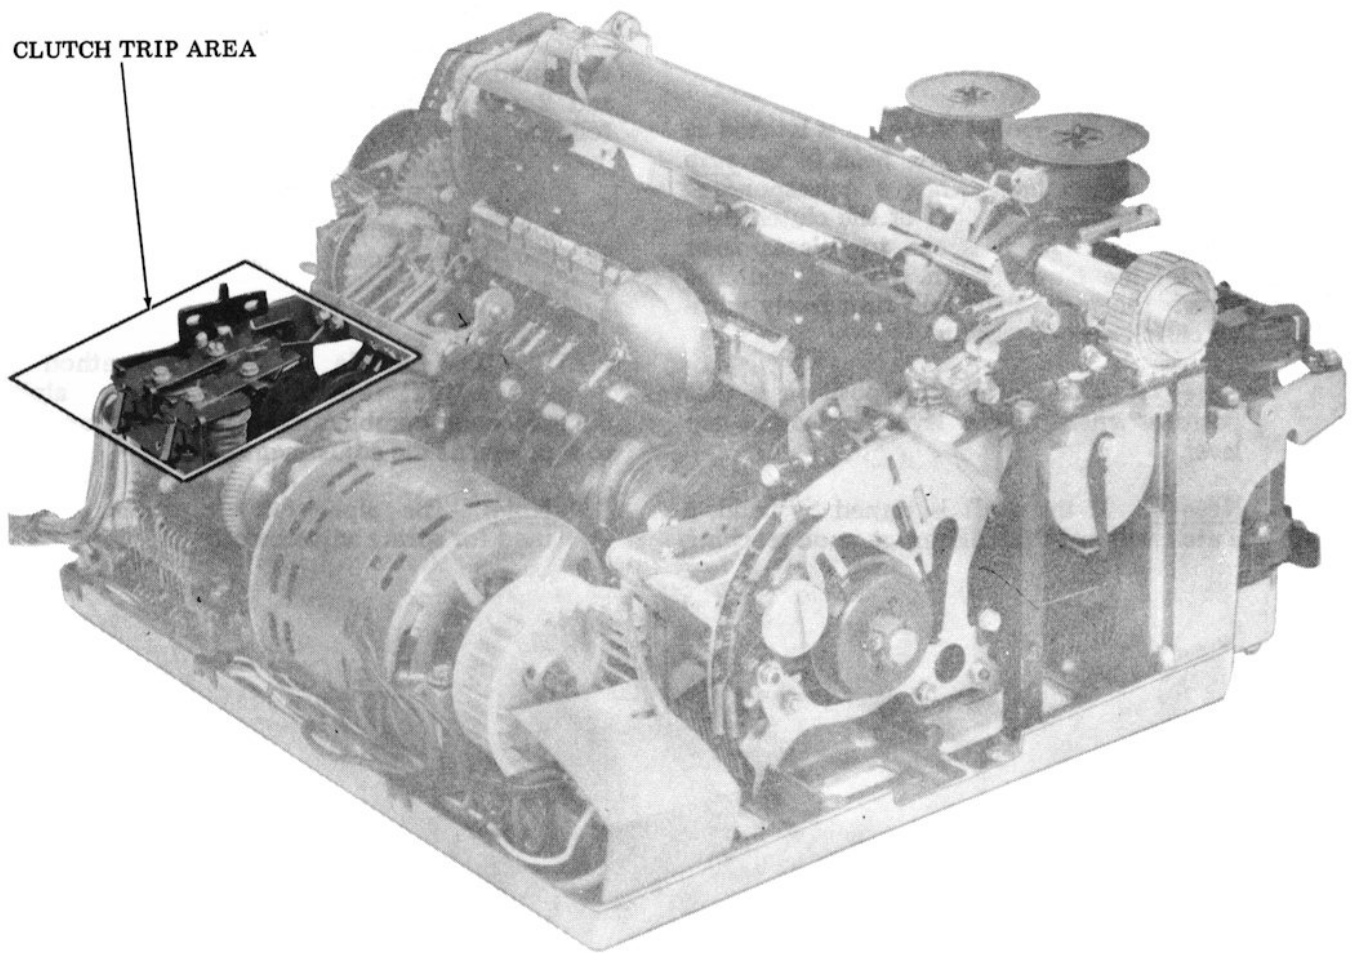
Clutch Trip Area (Without Reader Feed Magnet Contact Assembly)
